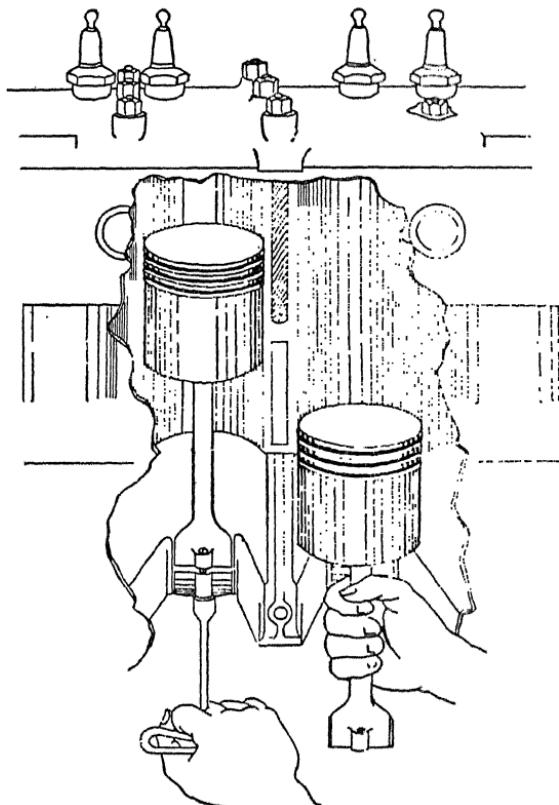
If the Lower End of the Connecting Rod Is Too Large, Pistons May Be Pulled from the Bottom
